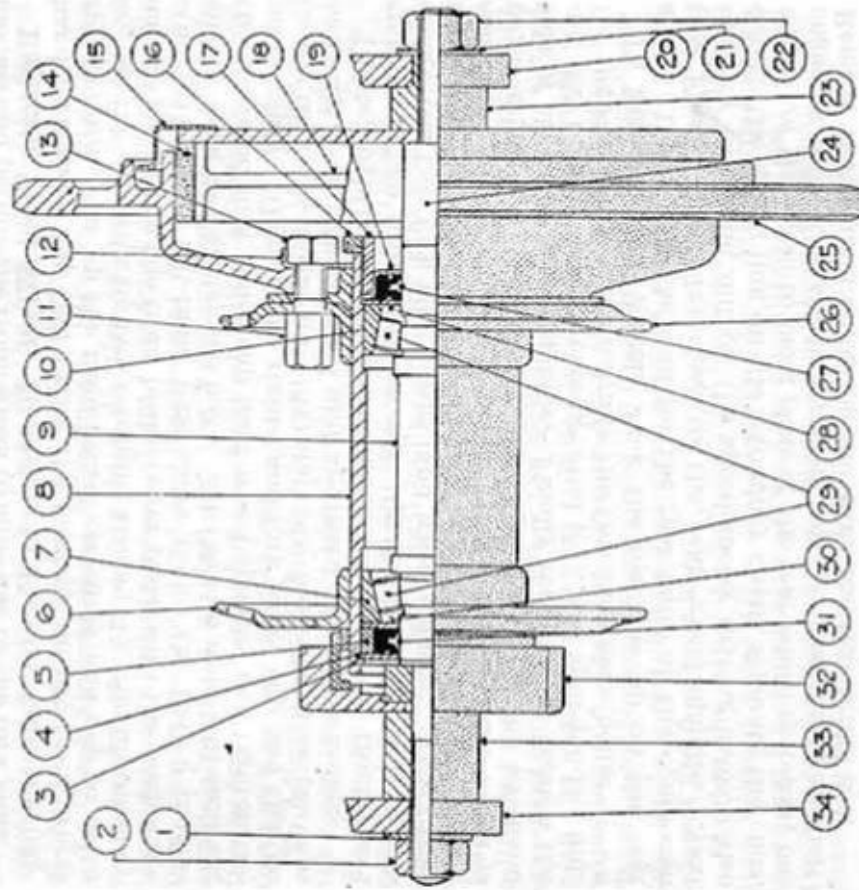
REAR HUB ASSEMBLY SHOWN PARTLY SECTIONED
